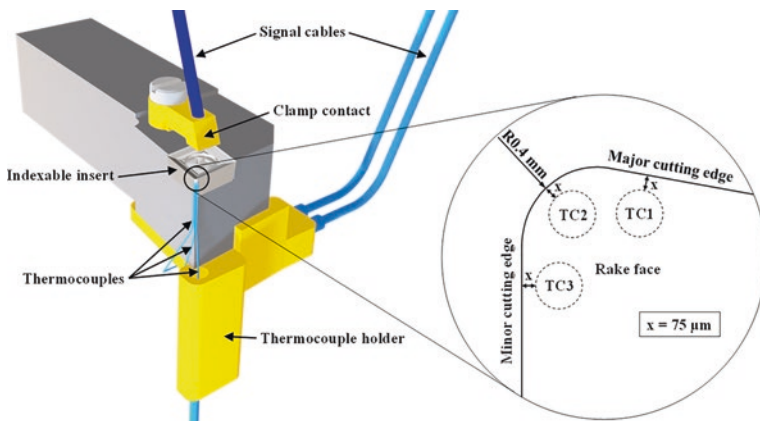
Tool-side setup for temperature measurement by embedded thermocouples and tool-workpiece thermocouple
